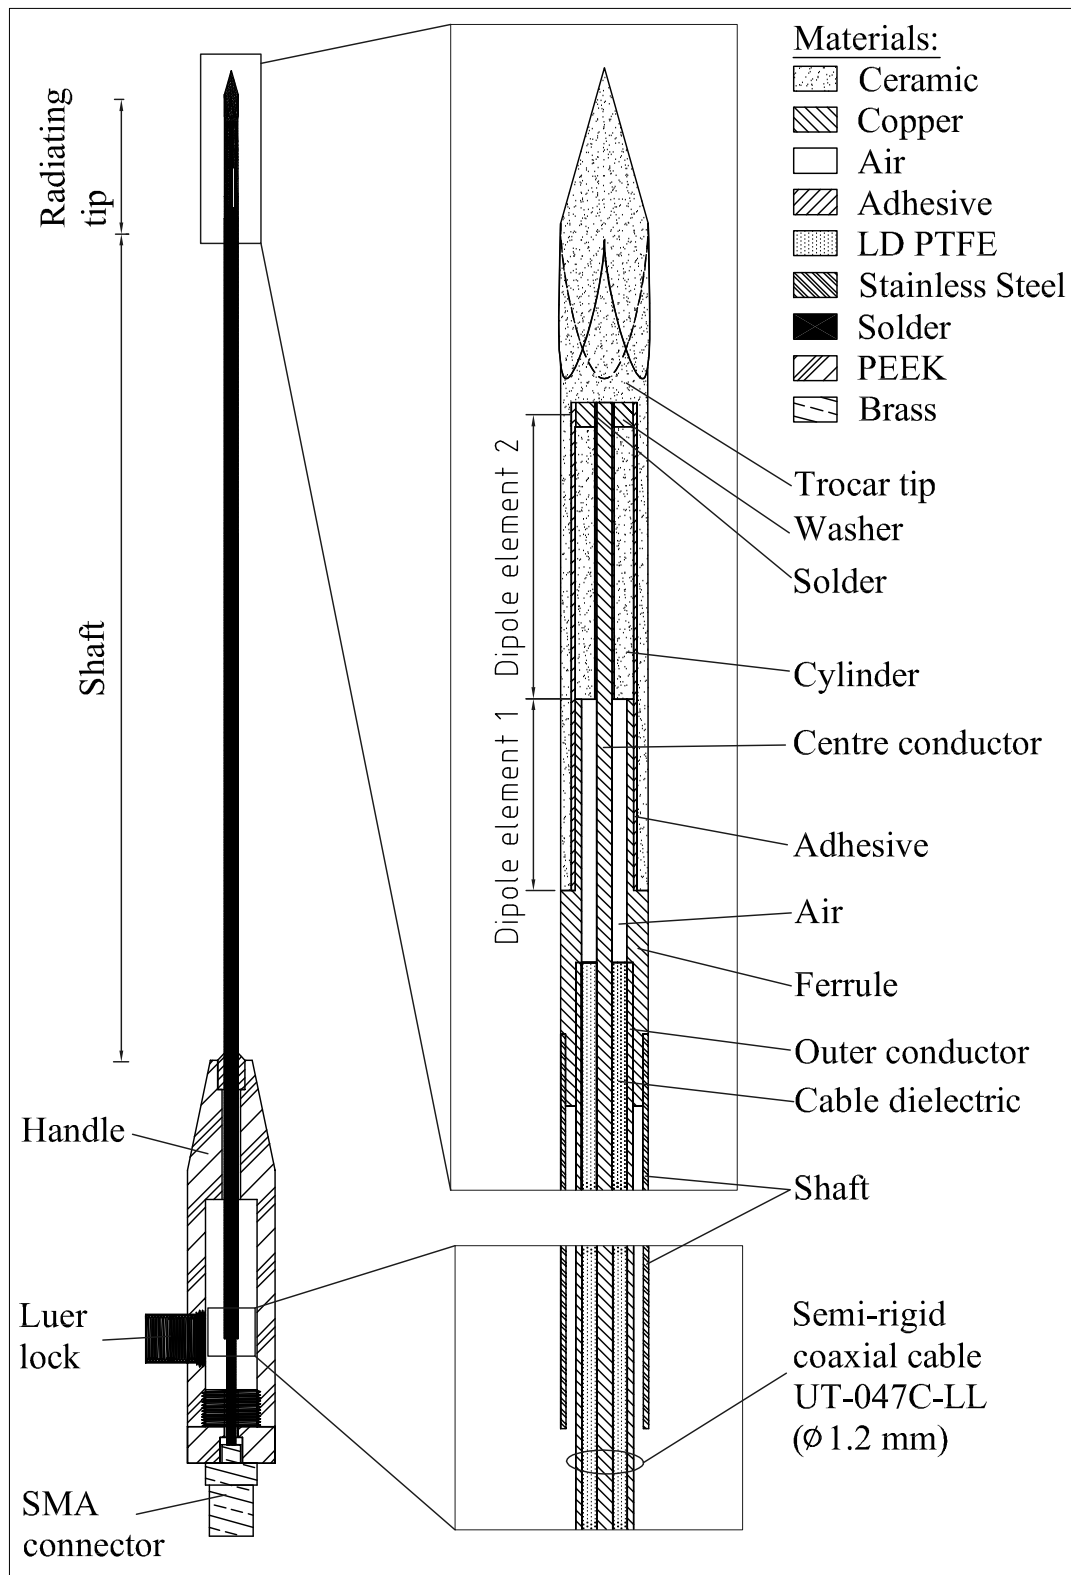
Design drawing of first 1.8 mm applicator with open-cycle cooling.
